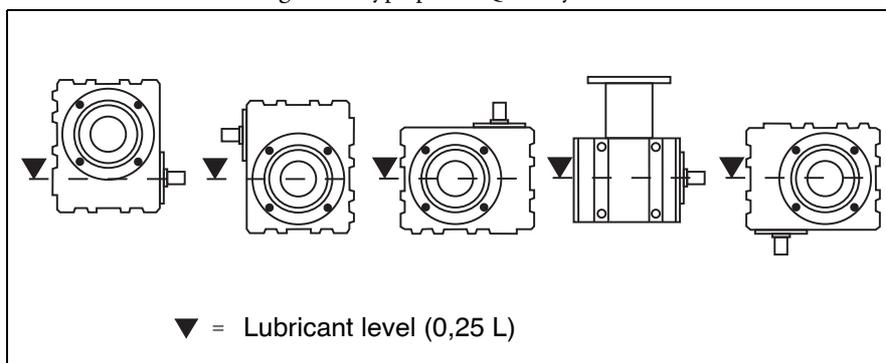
Recommended oil level in the gearbox depending on shaft position.
